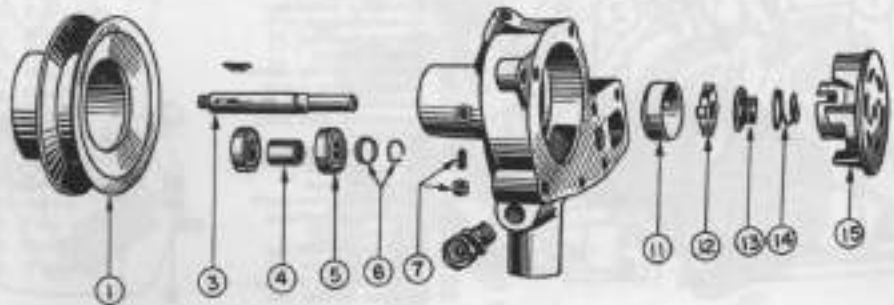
Early type ball bearing pump used on Continental engines.
